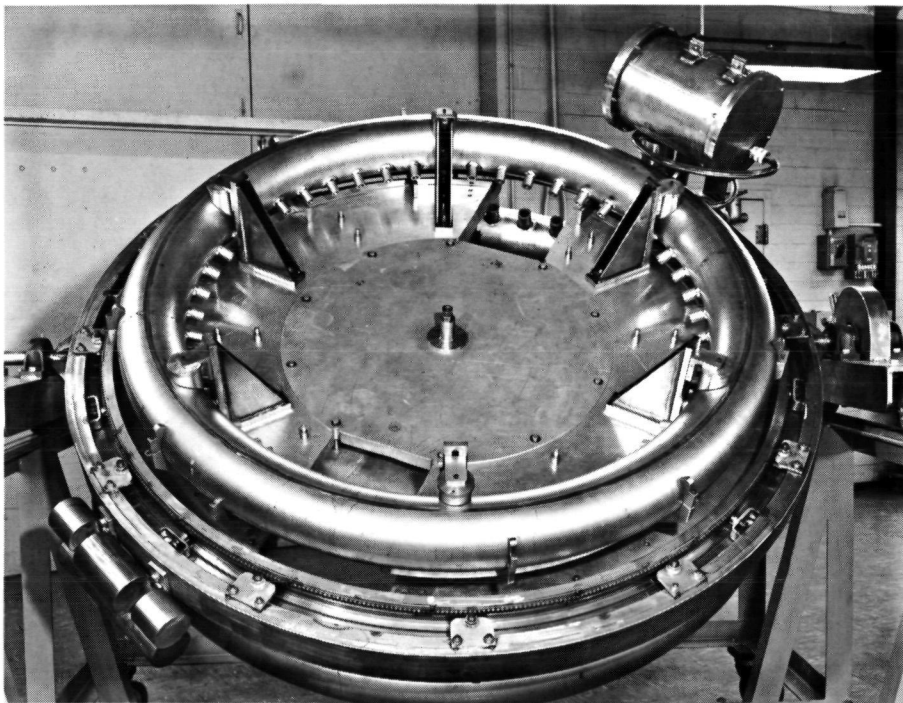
Welding Alignment Fixture for Outlet Manifold Support Tube. (P69-5-29A)
